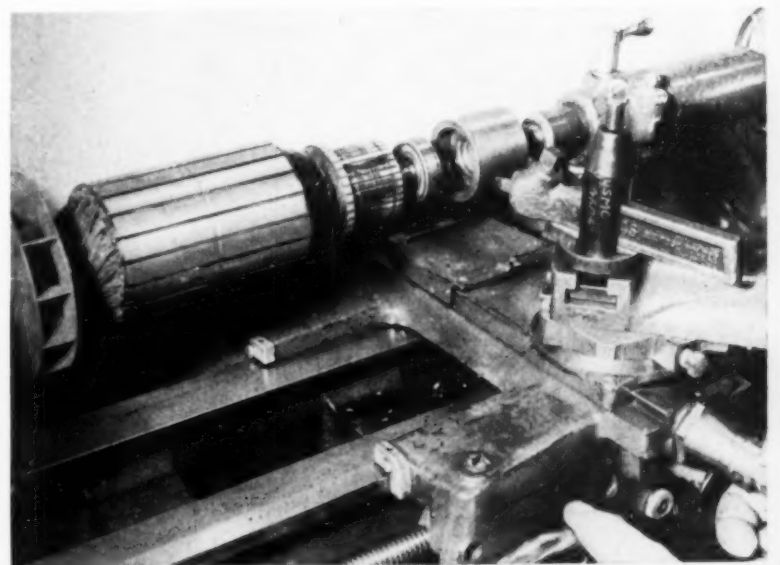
COMMUTATOR IS TRUED in a lathe set-up that uses as center rotor bearing, instead of shaft center.
